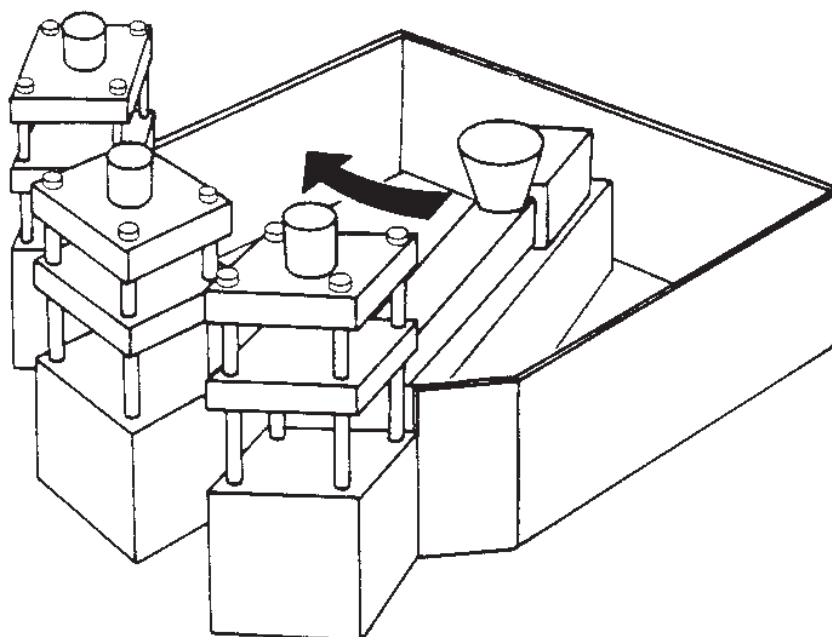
Example of multi-station machine with mobile plasticising and injection unit, shown without guards for the clamping units
